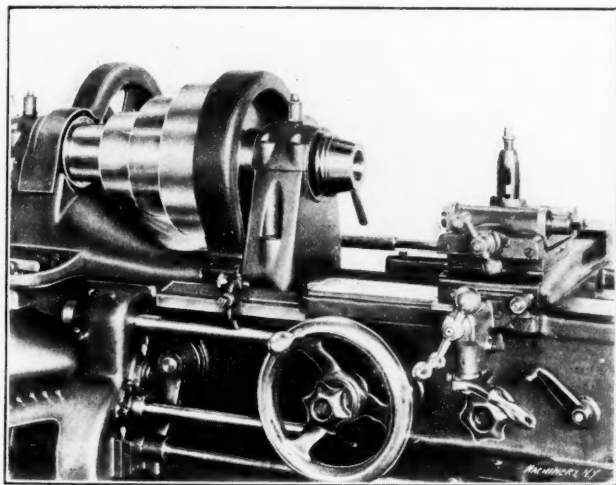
Quick Withdrawing Mechanism, Micrometer Stop, Elevating Toolpost, Etc.
